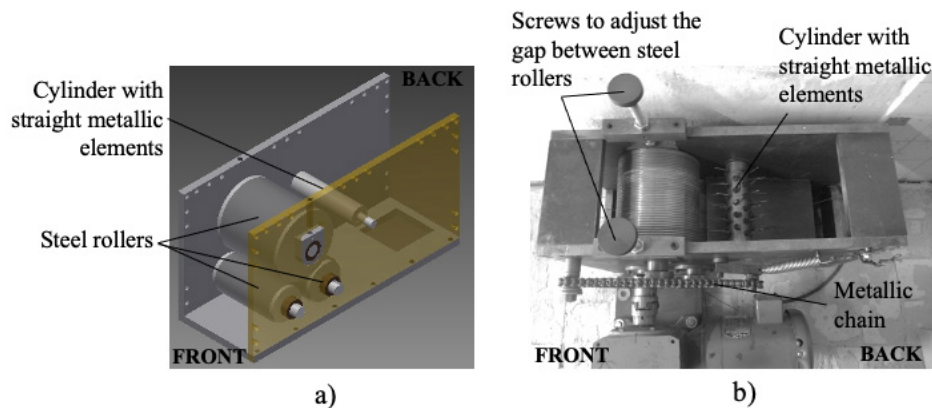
Crushing machine used to obtain bamboo guadua fibers.
